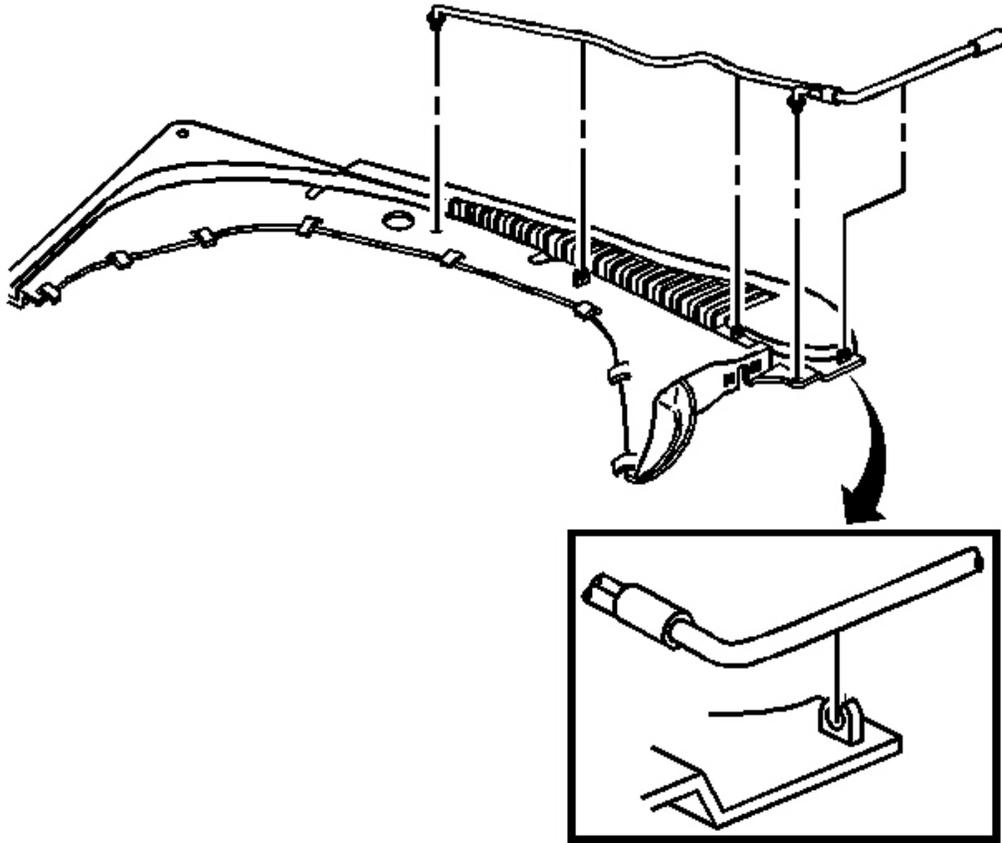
Washer Hose At Bottom Of Air Inlet Grille Panel
